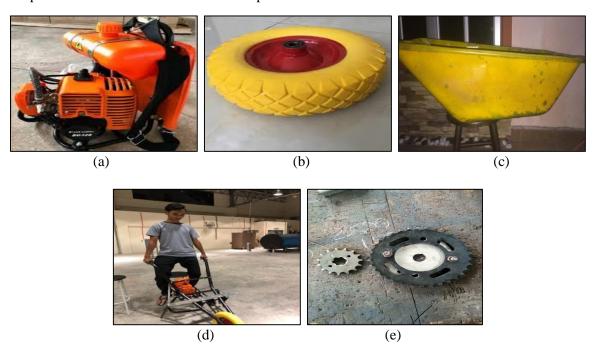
(a) 33 cc of lawn mower engine (b) Wheel (c) Bucket (d) Handle and (e) Sprocket
